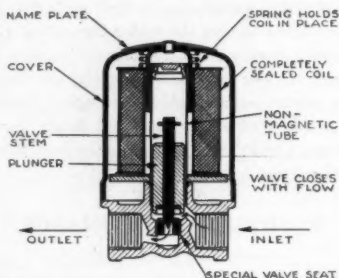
CROSS SECTION OF AUTOMATIC VALVE.
